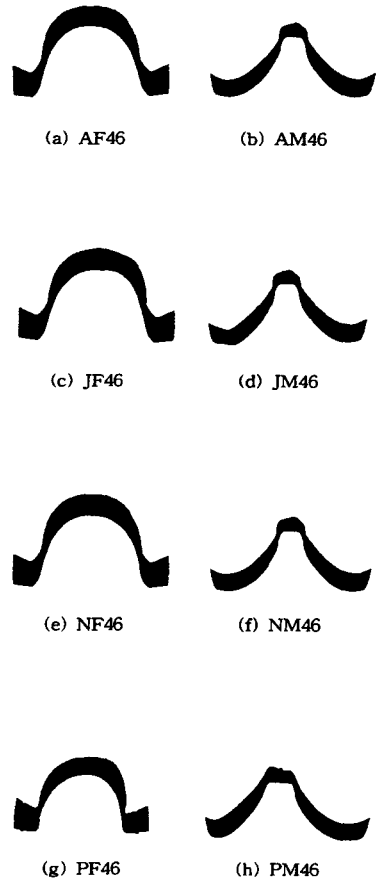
Contact Lines between a Cutter and the Surface Profile of Screw Rotors
